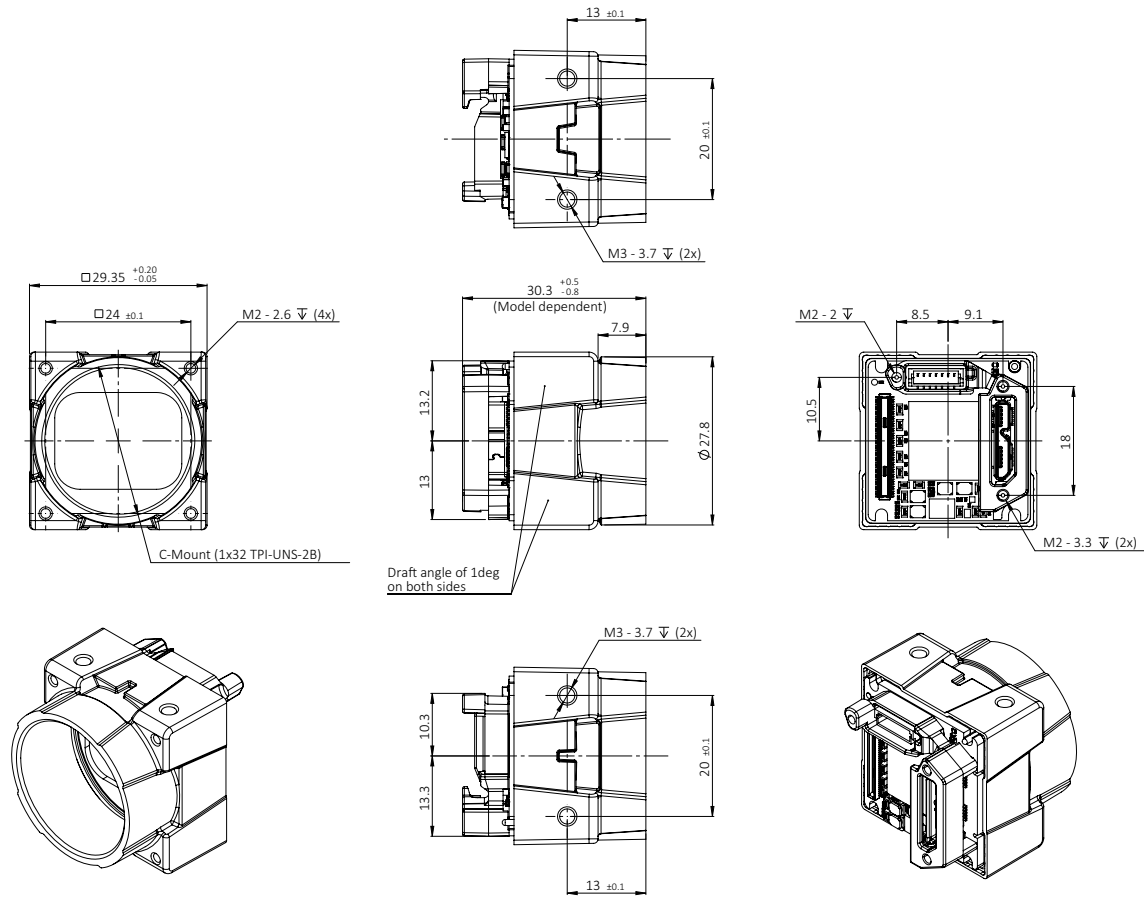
Open Housing C-Mount 180° (standard Alvium) dimensions
